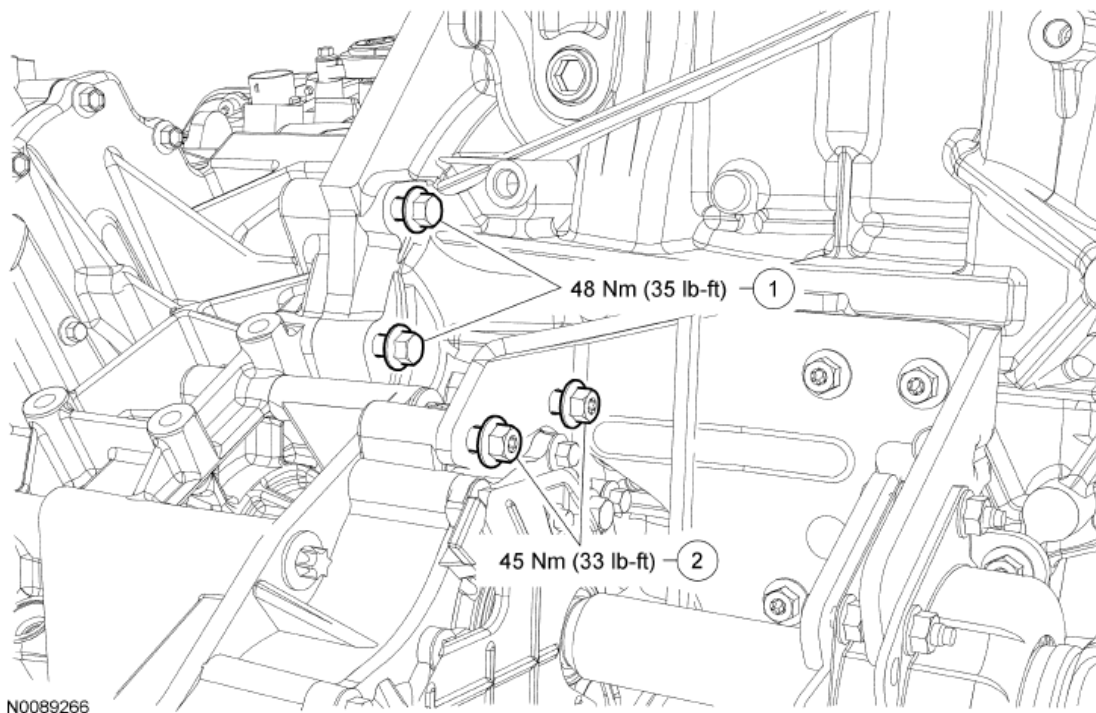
Identifying Bellhousing-To-Engine Bolts And Engine Bracket-To-Power Transfer Unit Bolts
